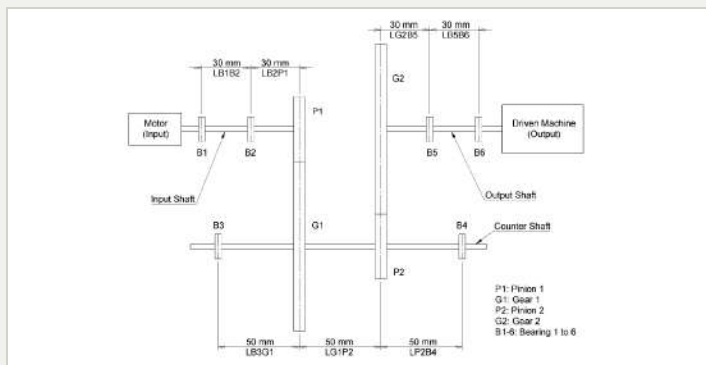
ASSEMBLY Two-stage reverted reducer – motor, input, counter, output shafts
